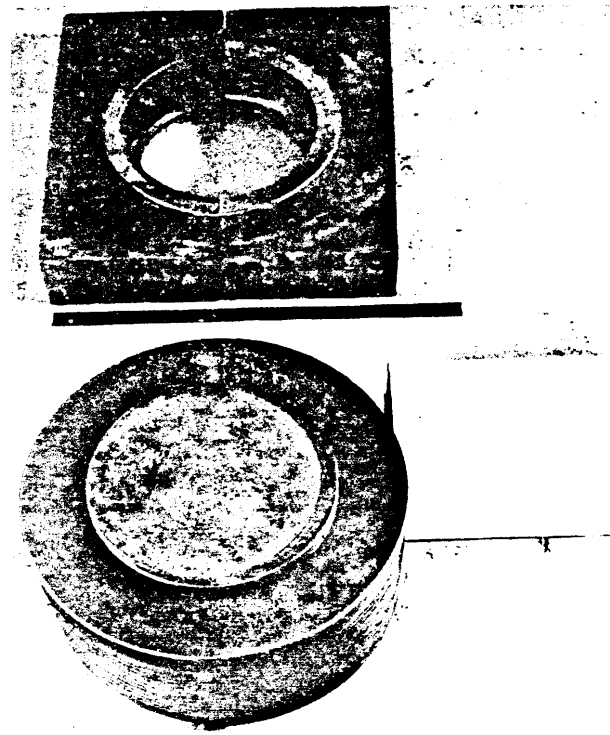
Inner face of components shown in Fig. 3.3-32. Note that inner face of Washer - Washer Nut assembly bears on outer face of Split Shims.
